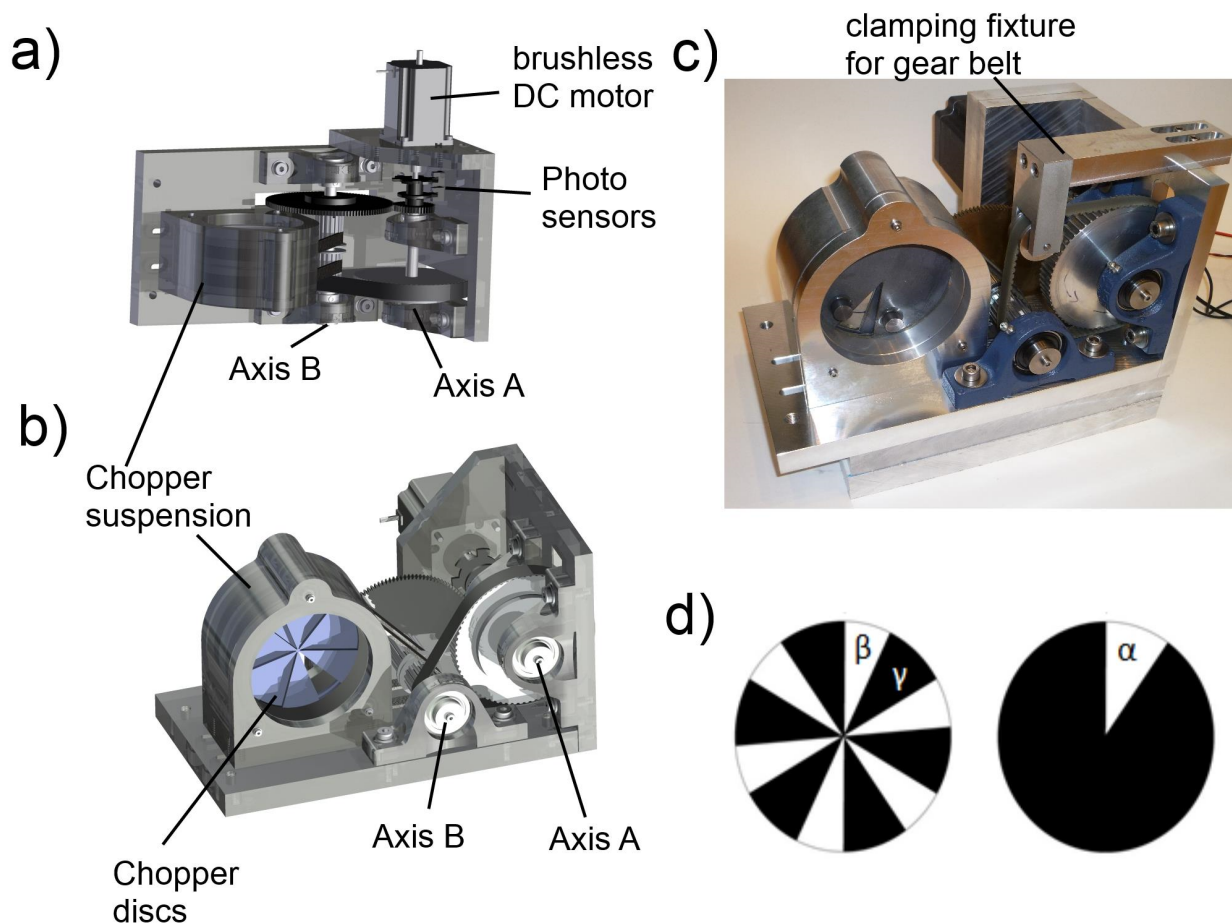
a) Technical drawing of the chopper system (top view), b) Technical drawing of the chopper system (front view), c) Photograph of the chopper system, d) the two chopper discs.
